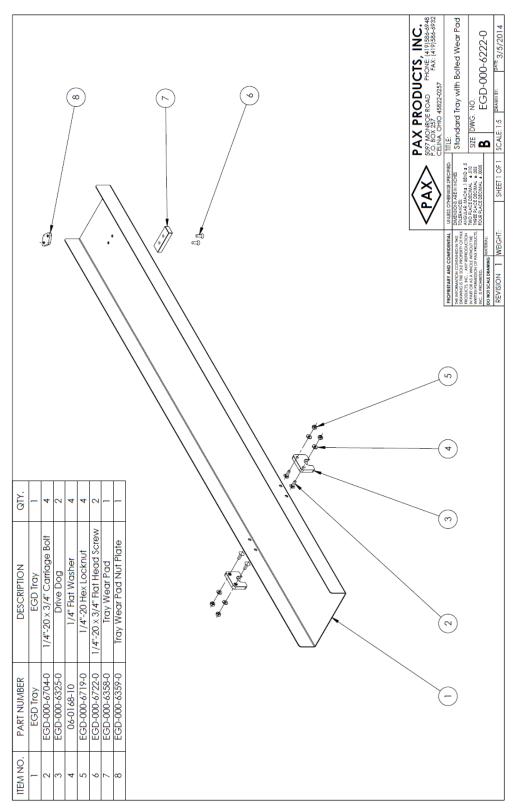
EGD-000-6222-0 STANDARD TRAY WITH BOLTED WEAR PAD
